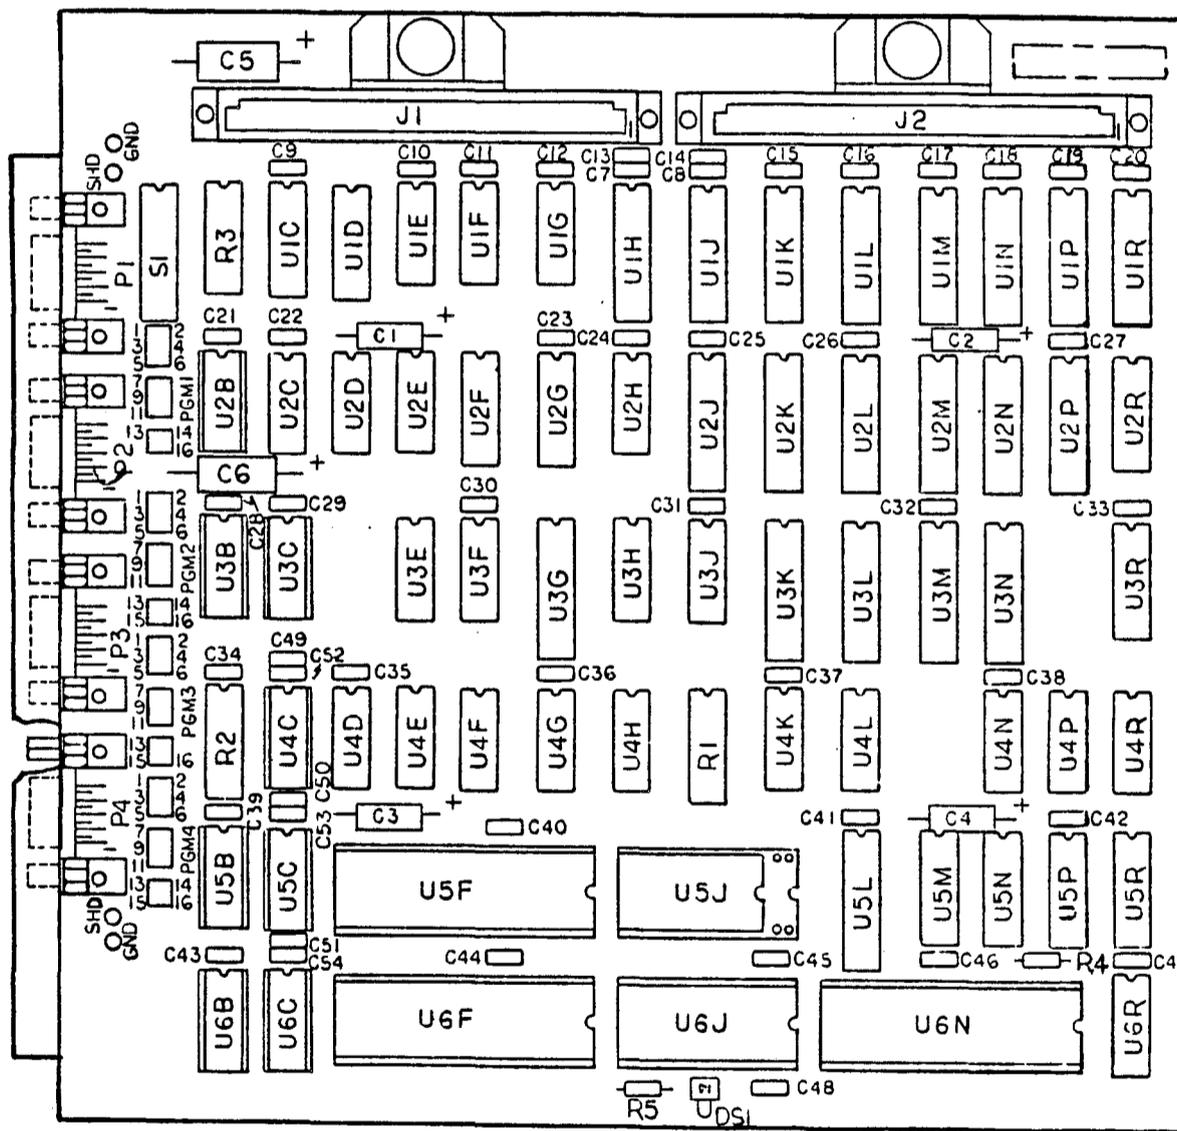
4-Way Controller PCBA - Part No. 903390
